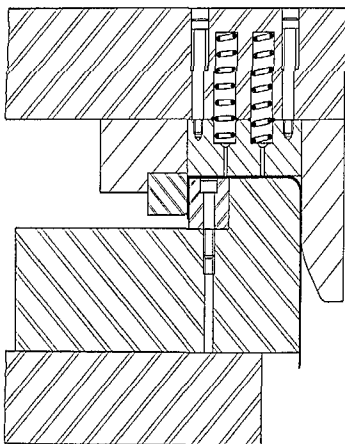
Final draw, pinch-trim, and blanking die for vending-machine door. (Mills Industries, Inc.)
